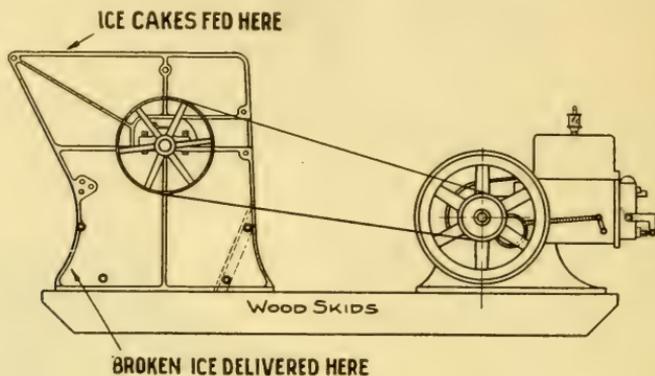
Arrangement of ice breaker driven by gasoline engine. Courtesy, Cochrane Corporation.
